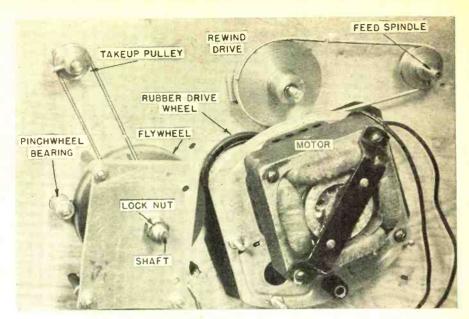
Underside view of top panel, shows details of mechanical assembly.
